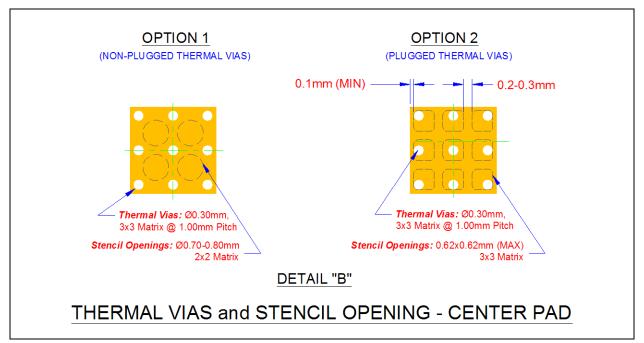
CAP1188 PCB Detail B - 24-Pin QFN 4mm x 4mm
